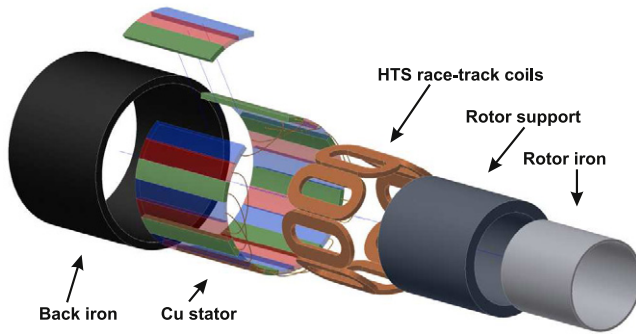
Generator layout extruded along the rotation axis. The stator back iron (left) is holding the three phase stator Cu winding. Superconducting racetrack coils are mounted on the rotor support structure which is holding an inner steel tube (right) to confine the magnetic flux between the rotor and the stator.
